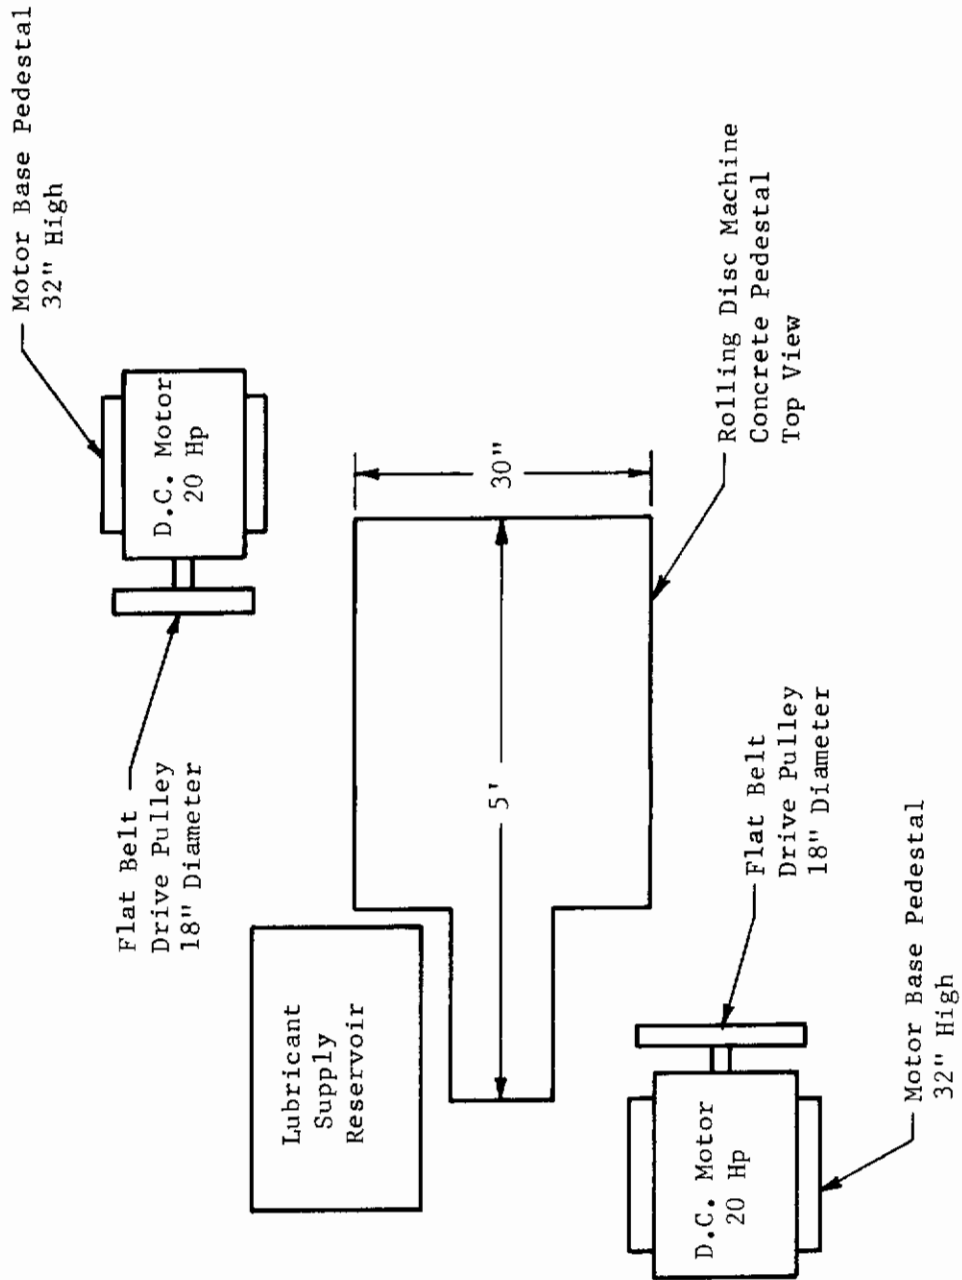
Top View of Rolling Disc Machine Base and Motor Drive Layout
